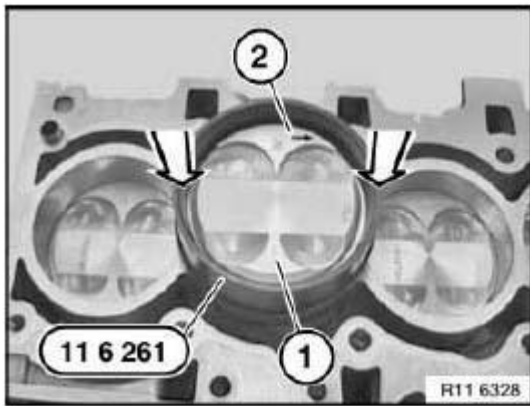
Pressing Piston With Special Tools (11 6 261)
